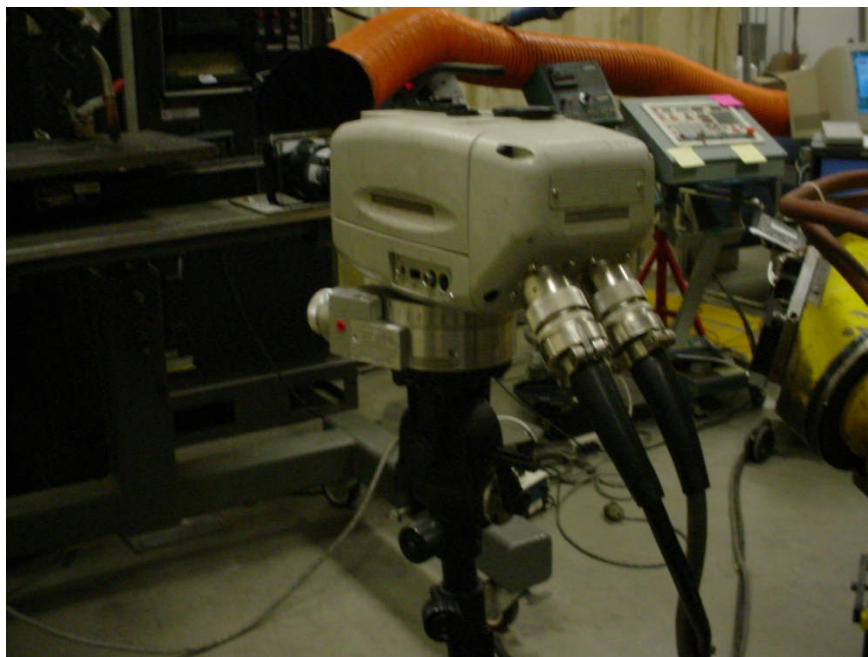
Kodak Ektapro HS HSV Camera Setup for Viewing the Weld Pool Perpendicular to the Welding Direction
